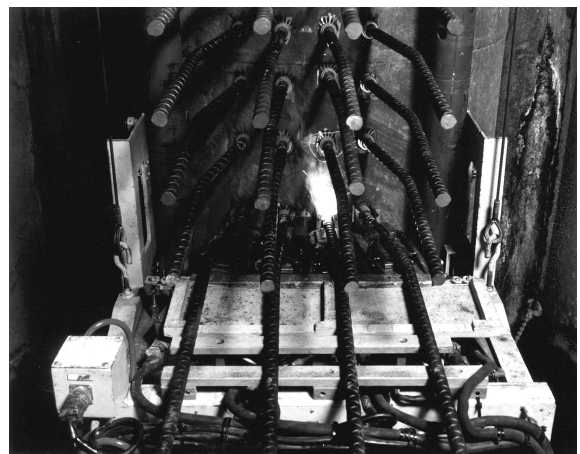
Automatic multi-stud welding machine (NS Stud Gun)
